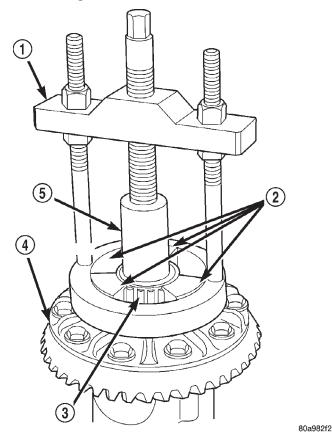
Differential Bearing Removal—8 1/4 Axle
